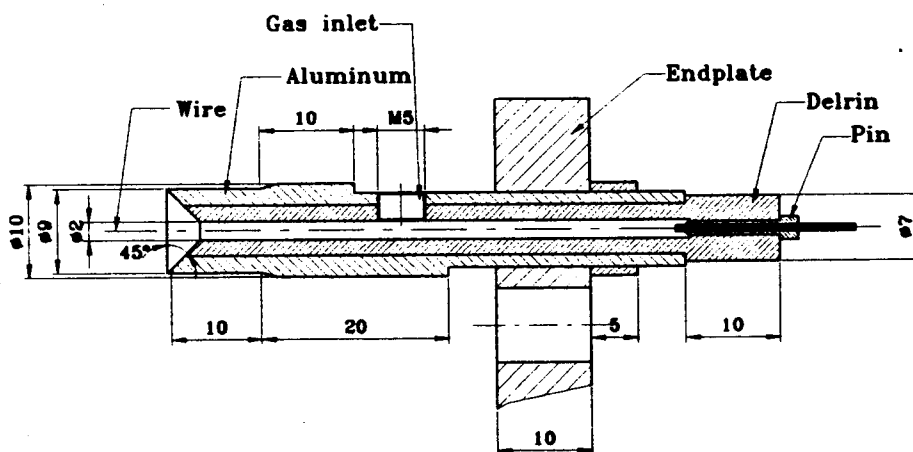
Feedthrough used for the prototype. All dimensions are in *mm*.
